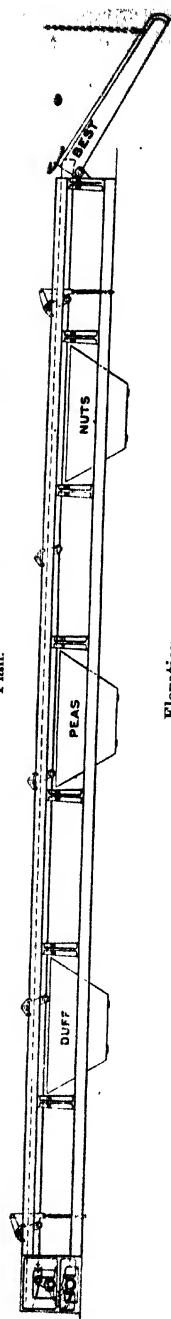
Zimmer conveying screen in elevation and cross-section.
